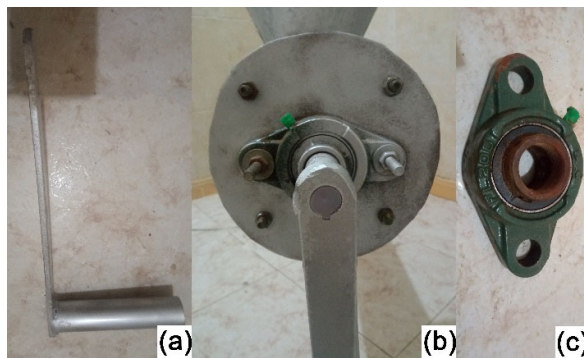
(a) Crank handle, (b) notch for the crank handle, (c) Self-aligning bearing housings
